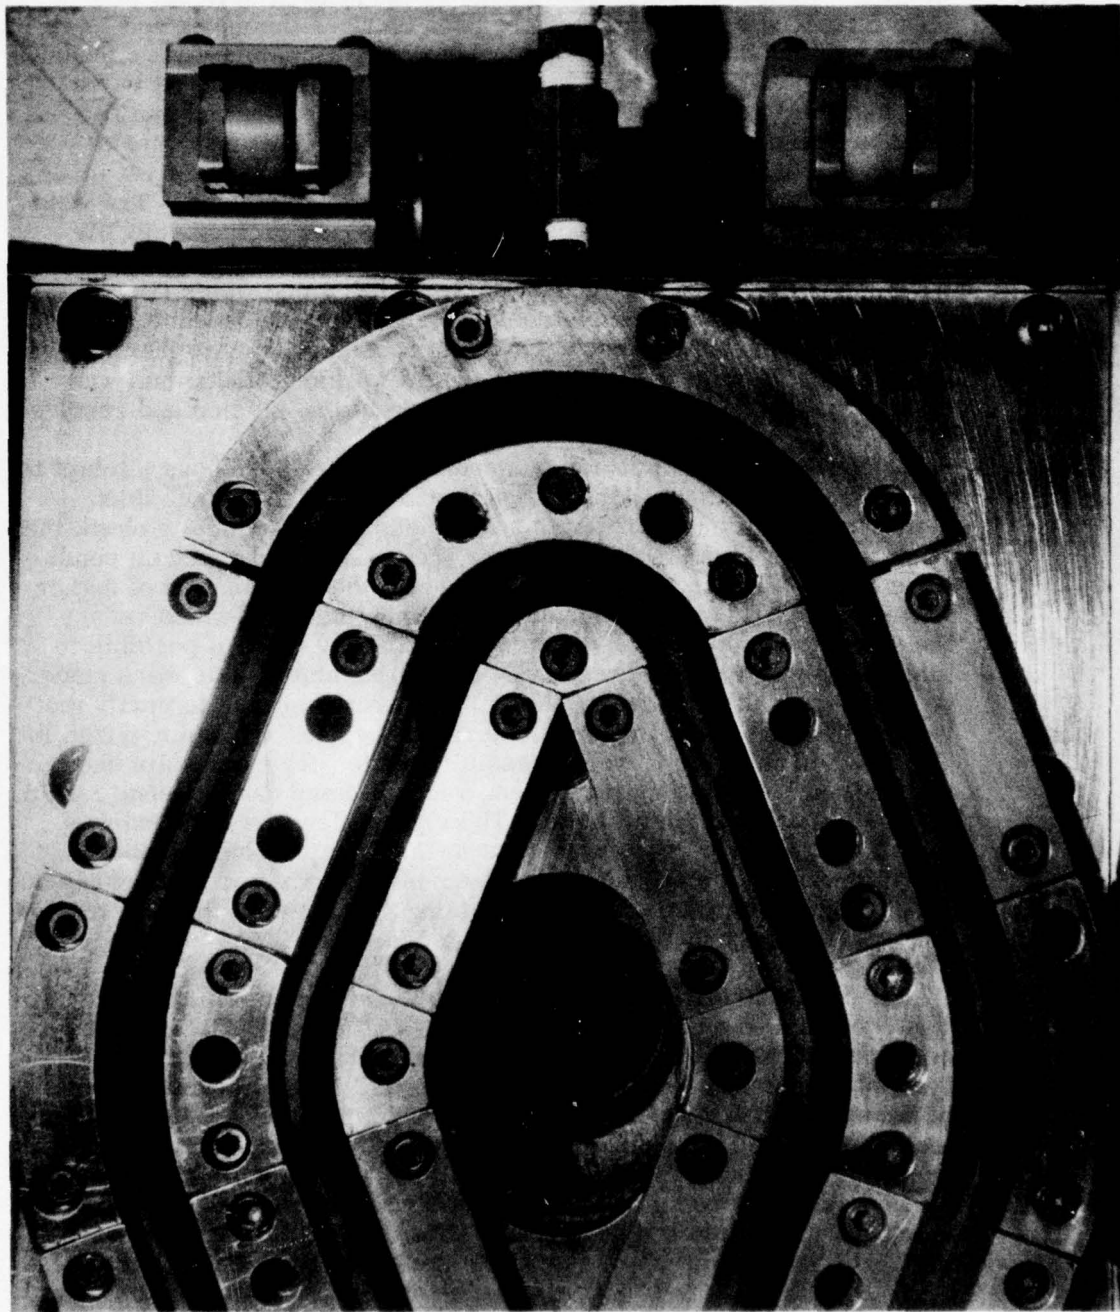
Sliding Seal Set No. 3 - Wear Caused by Long Butt
